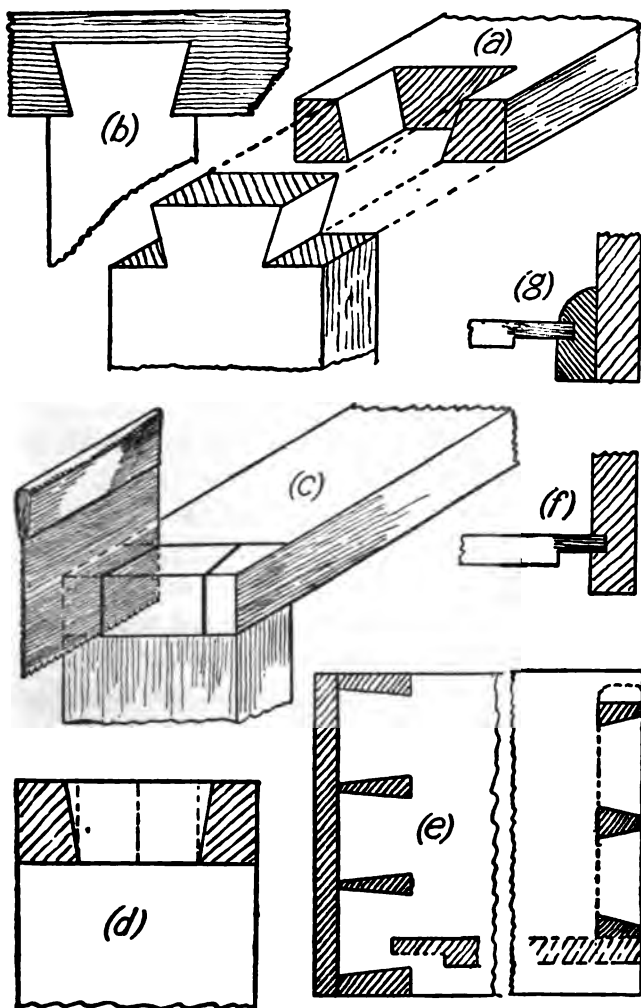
(a-e) Dovetailing ; (f, g) grooves for drawer bottom.
